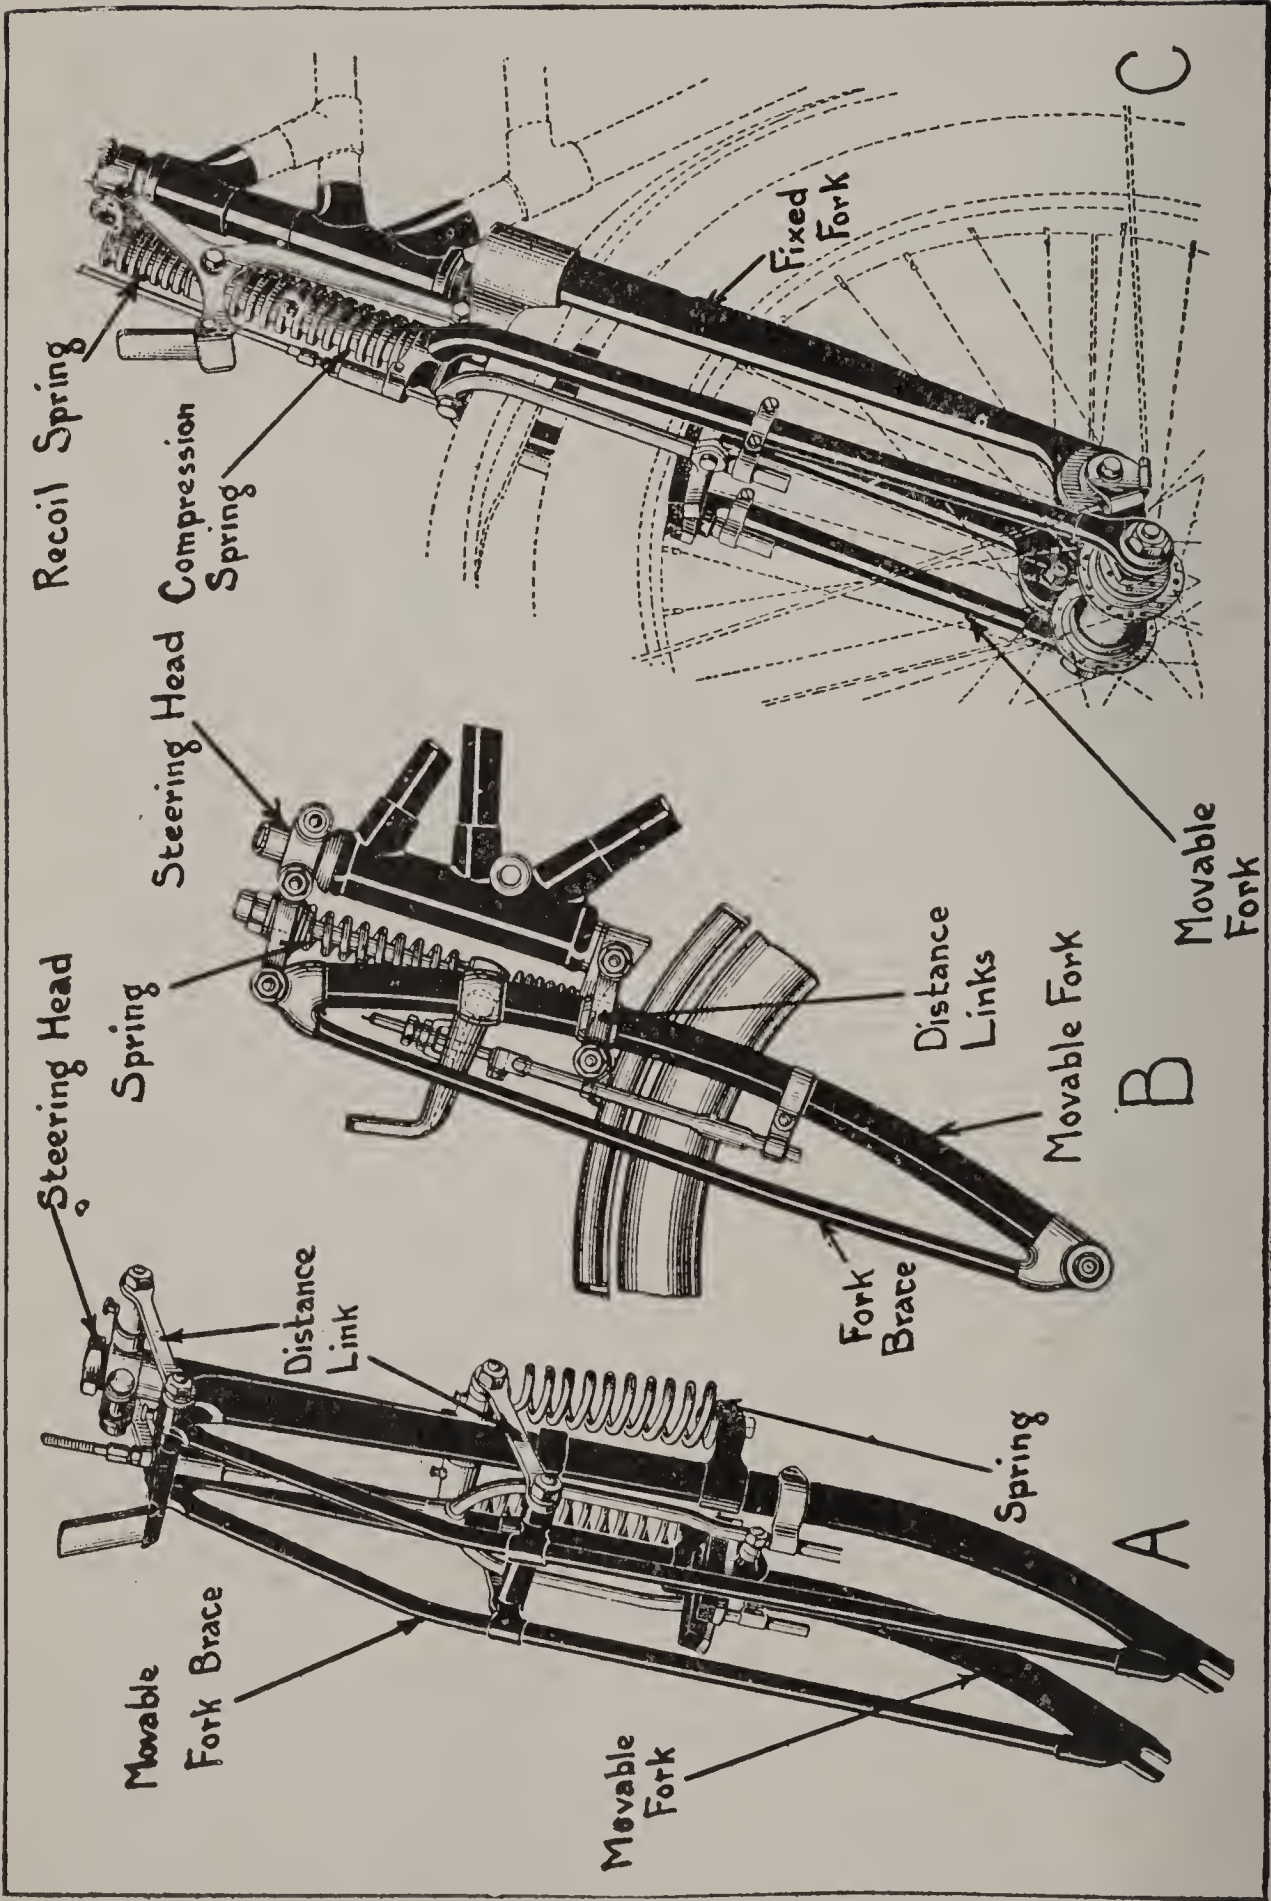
Spring Forks of English Design in Which Coil Springs are Employed Exclusively.
